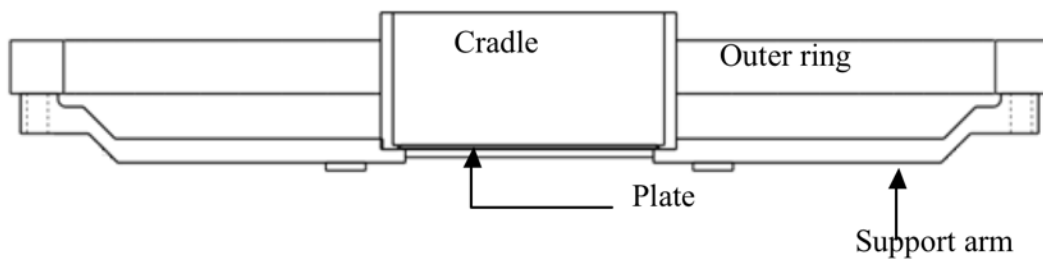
Cross-sectional view of the Outer ring, support arms and cradle assembly.
